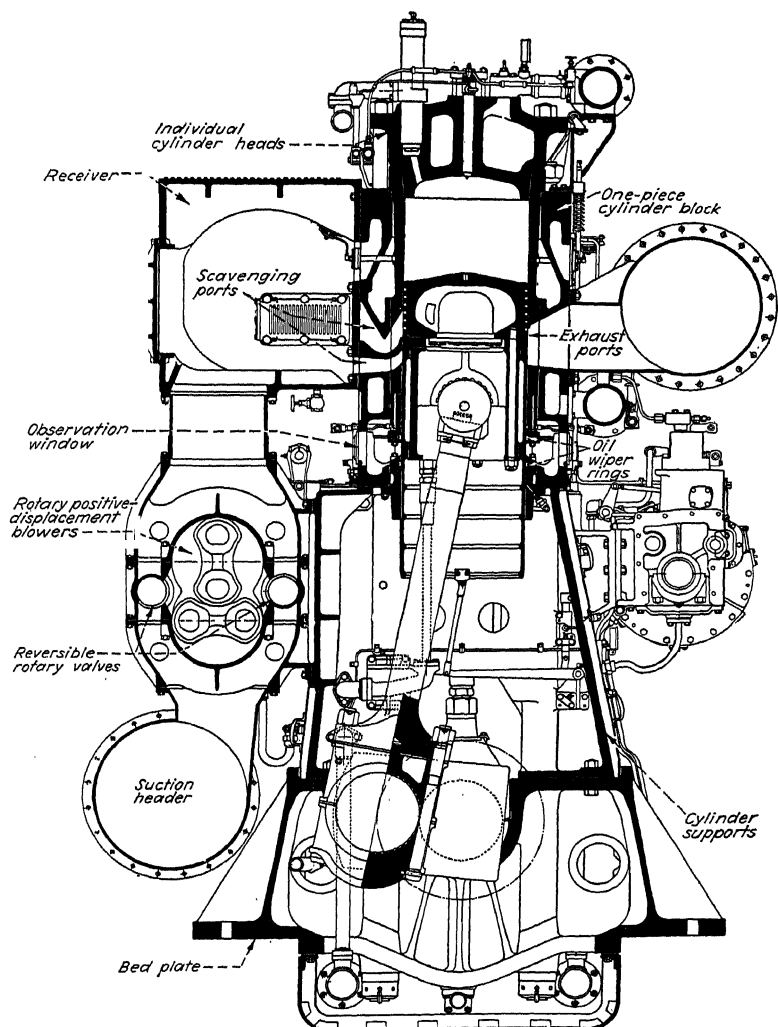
Sectional view of Busch-Sulzer Bros. engine with trunk piston construction. (Courtesy of Power.)
